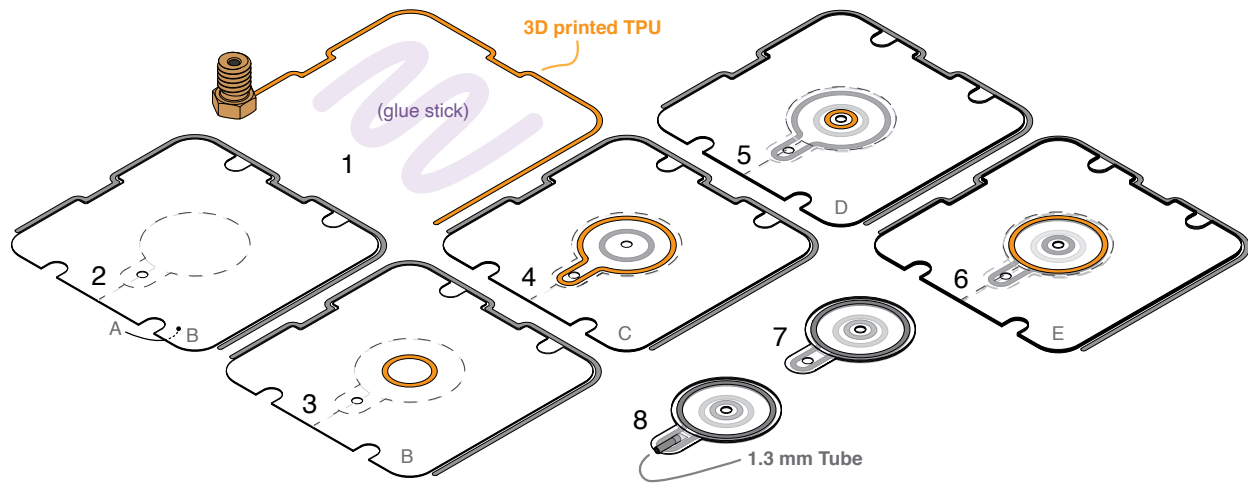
The steps for fabricating bellows actuator using the cut TPU patterns from Figure 6.4 is shown. 1) A guide is printed on the print surface with notches to align the TPU patterns. Adhesive from a glue stick is manually deposited onto the print surface inside the guide. 2) Patterns A then B are manually placed on the print surface. 3) TPU is printed in the shape of a ring joining patterns A and B along the ring. This forms the base of the bellows actuator. 4) Pattern C is placed on top followed by TPU printing in the shape as shown to join pattern B and C which forms the inlet. 5) Pattern D is placed on top followed by TPU printing of a small ring joining pattern C and D. This completes the first bellows actuator and forms the base of the second bellow. 6) Pattern E is placed on top and the final ring of TPU is printed. This forms the second bellow. 7) The bellows are removed from the print surface and patterns are manually torn along the perforations. 7) A 1.3 mm diameter copper tube is inserted into the 2 mm opening at the inlet and a small bead of UV-cured adhesive is used to pneumatically seal the tube and bellows.
